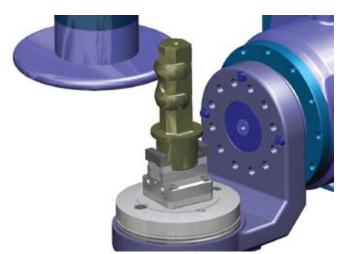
Sketch of simultaneous cutting on a 4-axis machine -XYZA.
